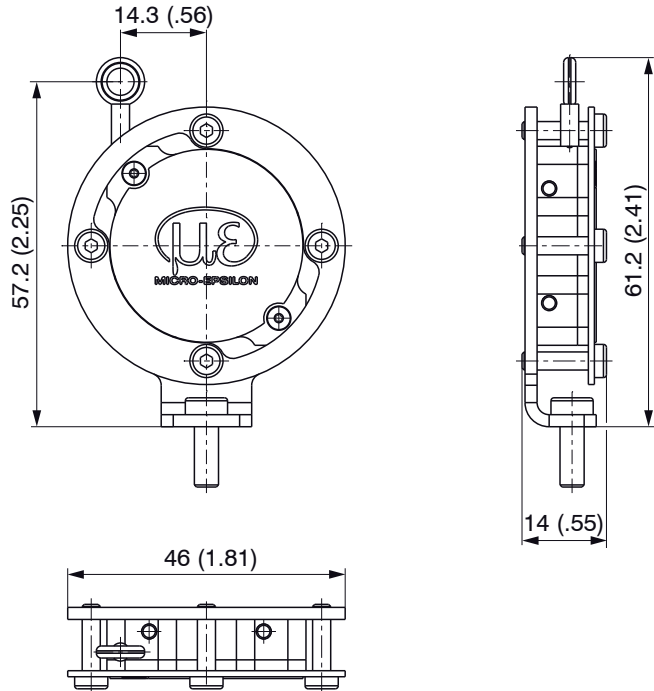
Dimensional drawing of WDS-MB33 mounting bracket set - side view, dimensions in mm, not to scale
